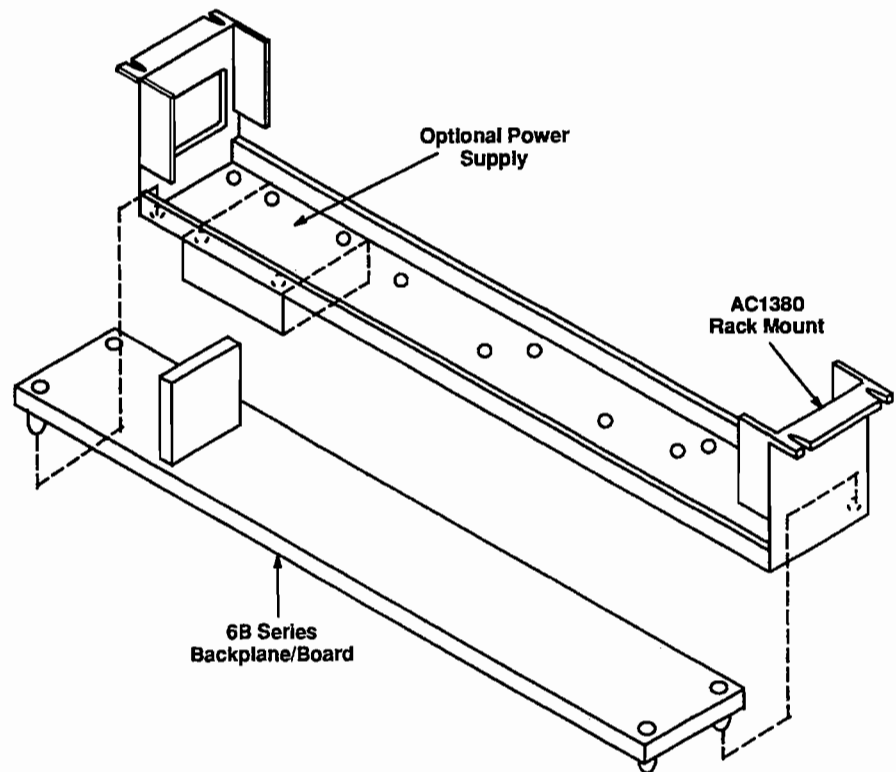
Installing a Backplane or Board into the AC1380 Rack Mount
